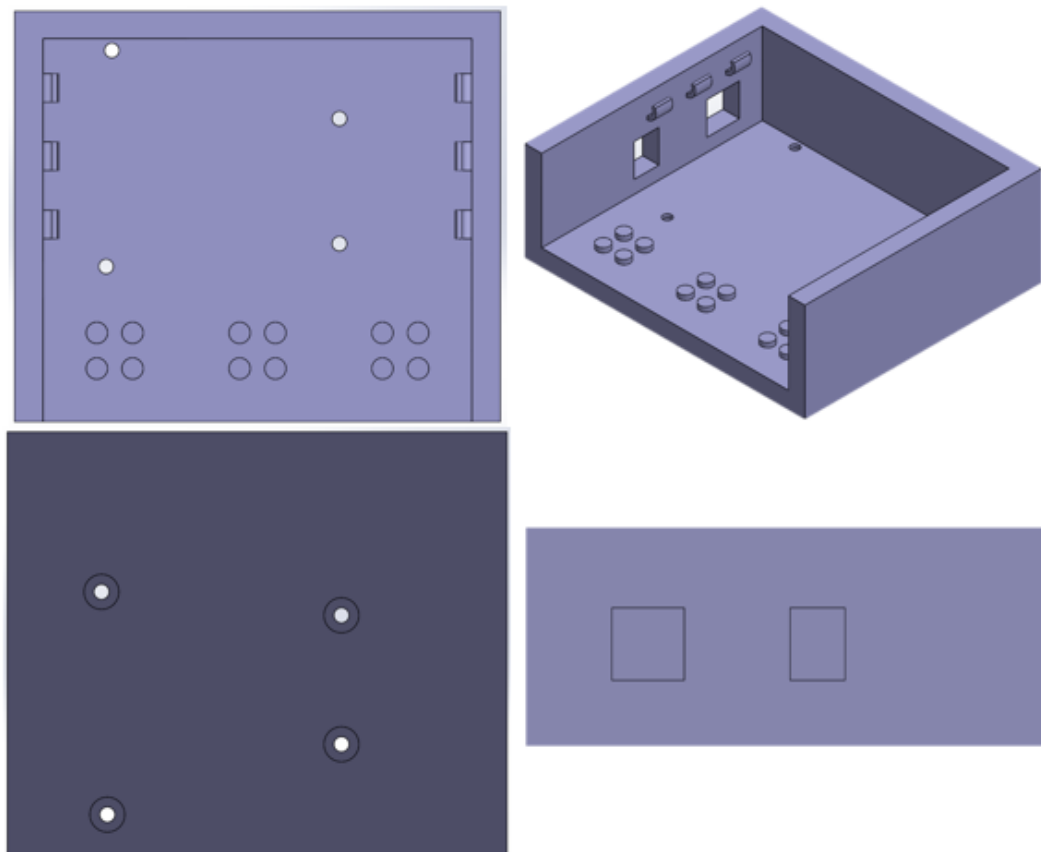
Third Iteration SolidWorks Model of Main Platform: Bottom View (Bottom Left), Top View (Top Left), Left Side View (Bottom Right), and Isometric View (Top Right)
